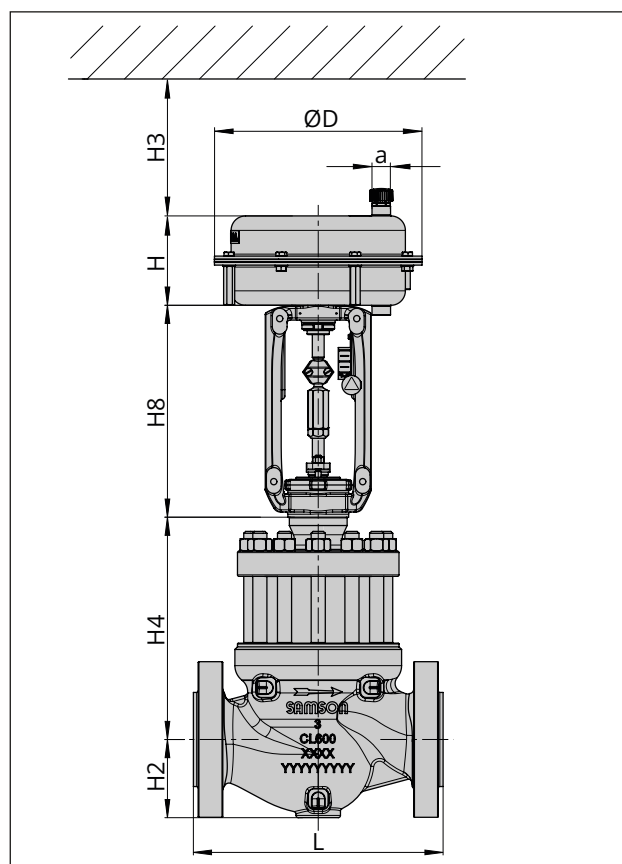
SMS HG-1 Control Valve: Type 261GR Valve with Type 3271 Pneumatic Actuator
